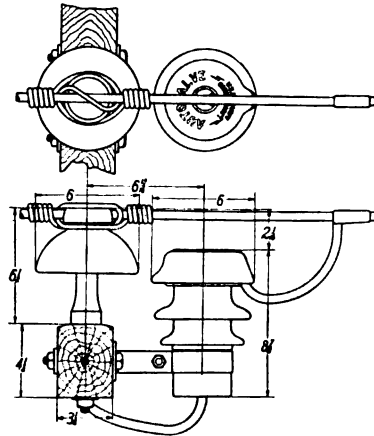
SIDE AND TOP VIEWS OF 7500-VOLT ARRESTER WITH FORM H MOUNTING BRACKET
